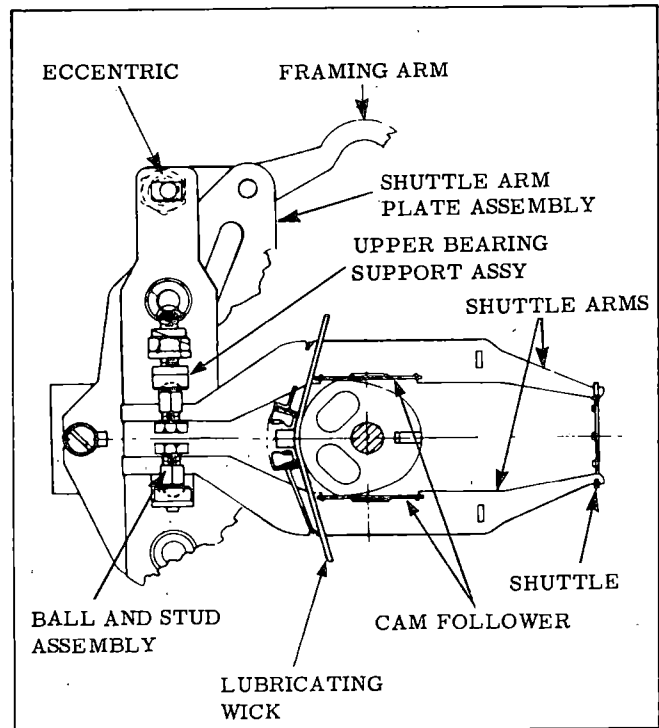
Figure U. Adjusting Fit of Shuttle Arms to Pull-Down Cam
